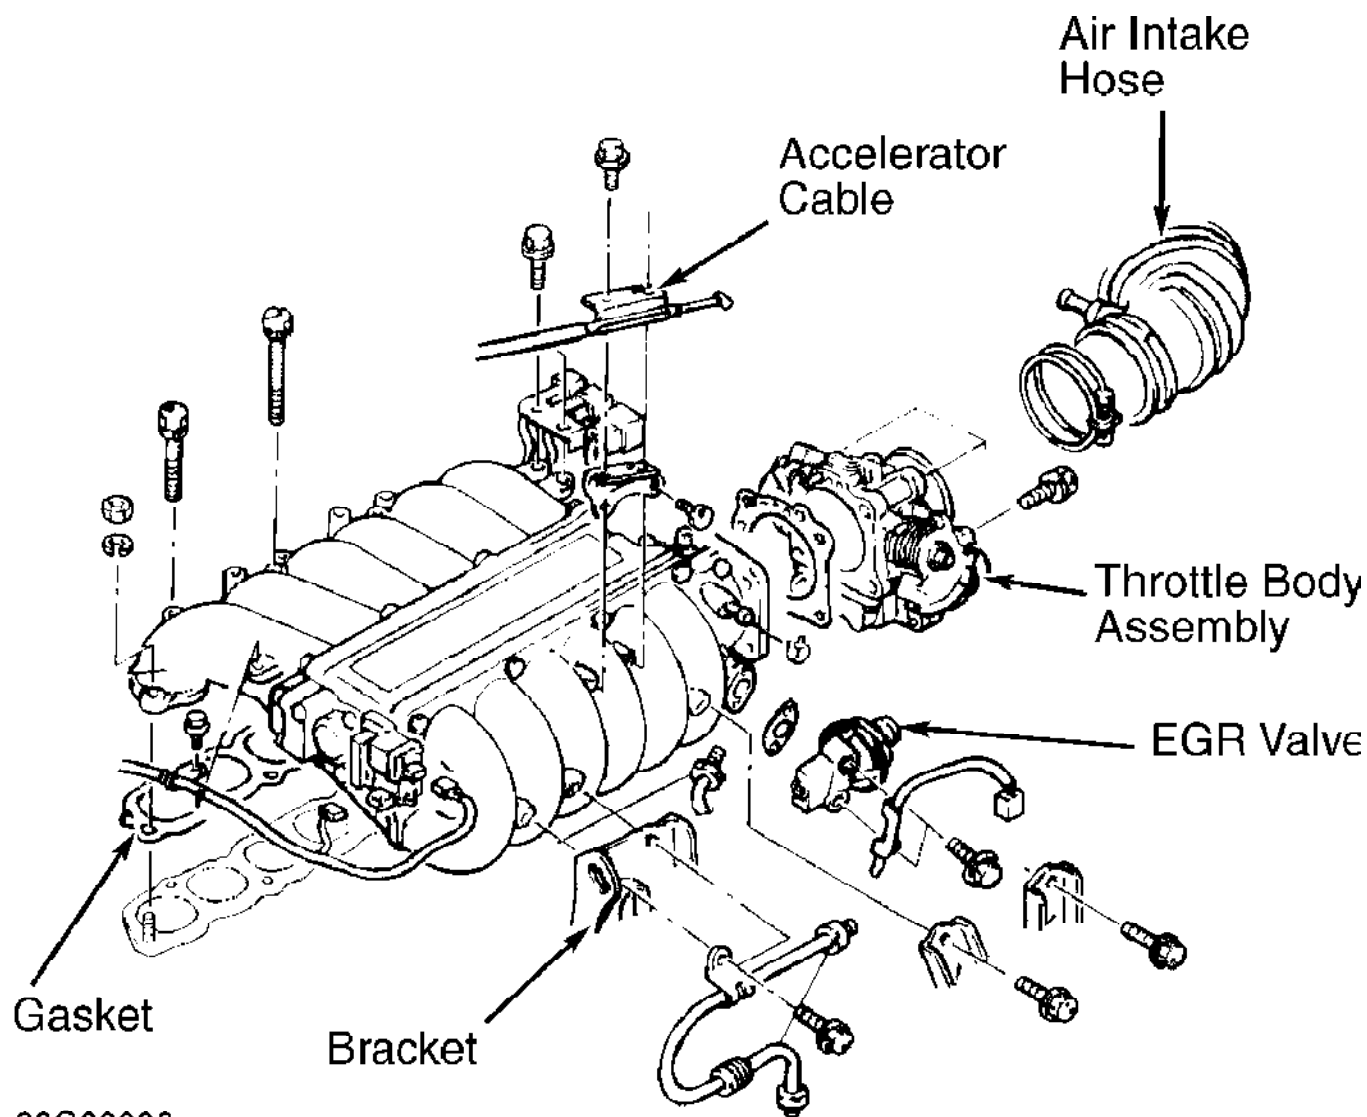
Exploded View Of Typical Upper Intake Manifold Components (3000GT - SOHC & DOHC With Turbo)
